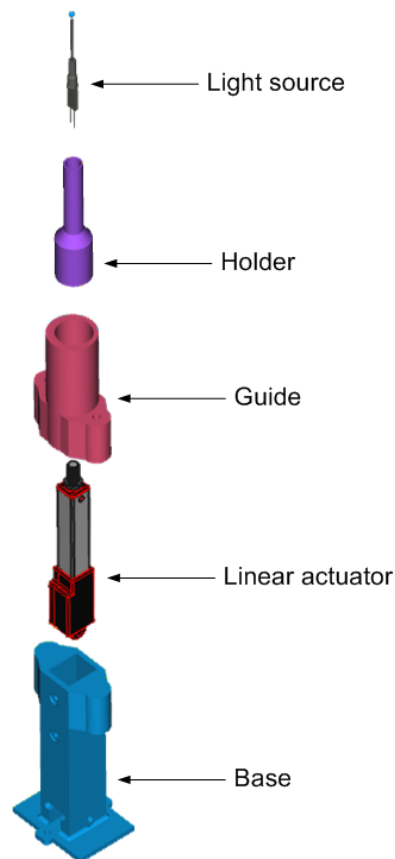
Exploded view of the light source moving stage assembly.
